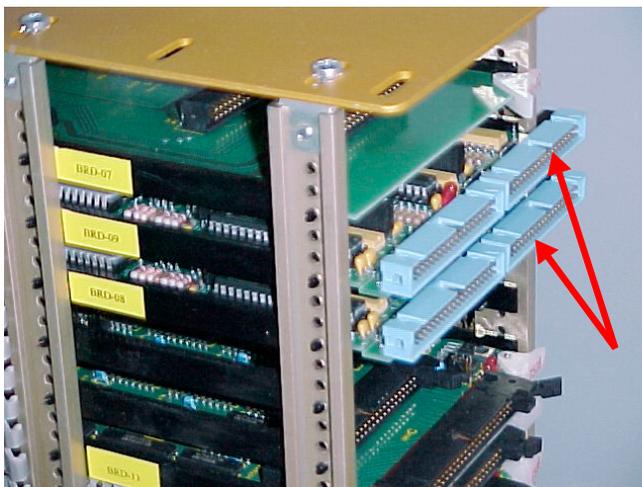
Card Cage Rack — 16-Channel T/C Boards indicated
